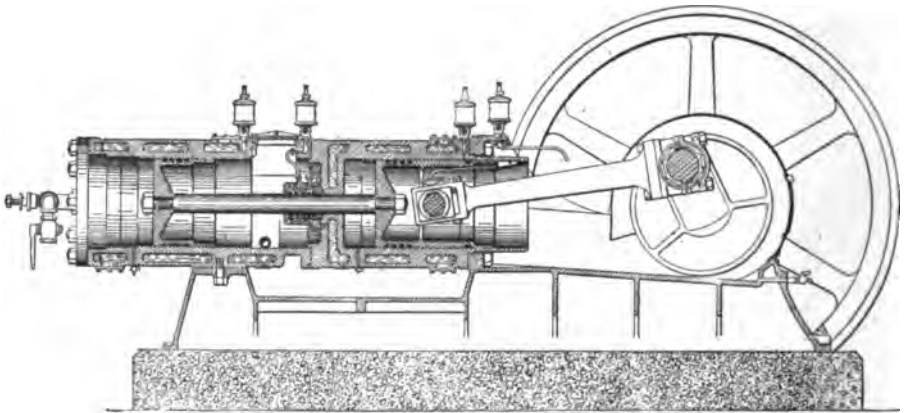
Section Through Cylinders and Pistons of Buffalo Gas Engine.
